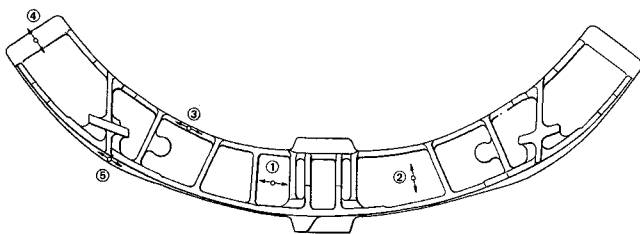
Fuselage frame forging (locations of residual stress measurement are indicated).
